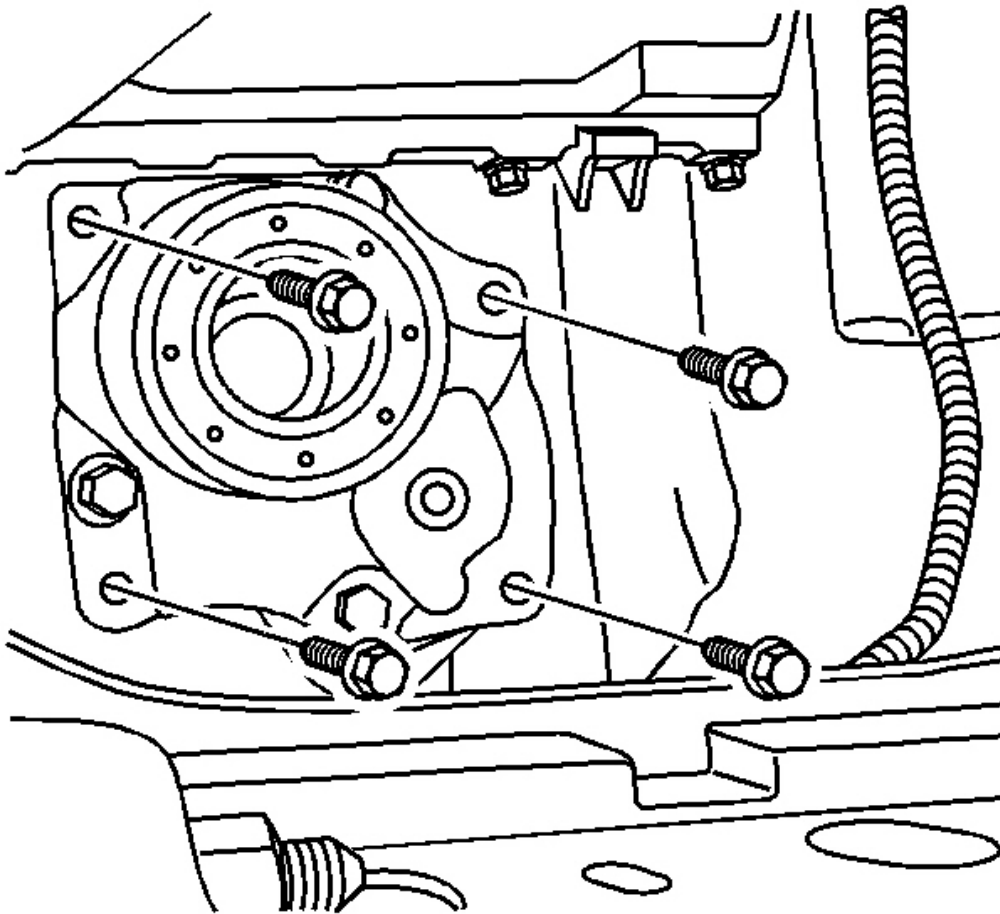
Intermediate Shaft Bearing Assembly Mounting Bolts - Front Drive Axle (A4WD)
